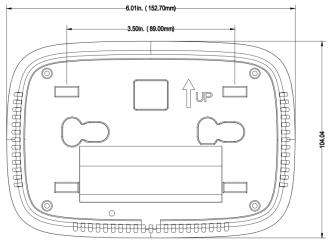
Lakepro-1 rear dimensions in inches. (mm).
